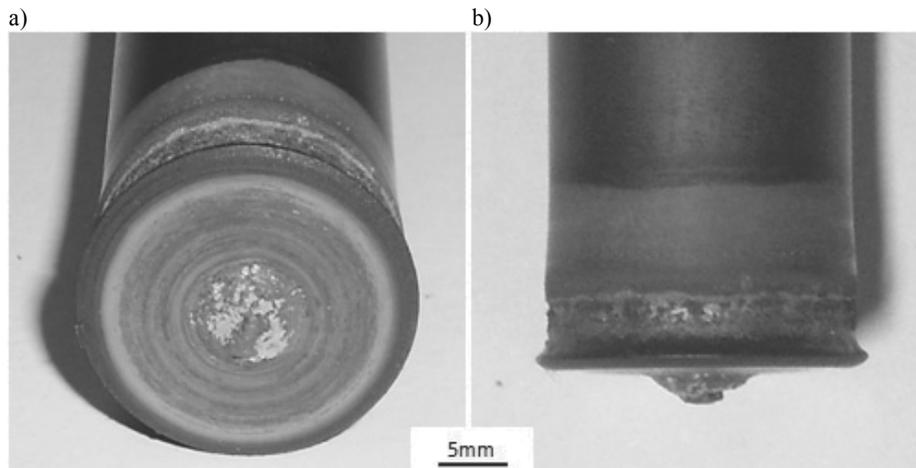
(a) Front view of the worn tool after the FSW process, (b) side view of the worn tool
